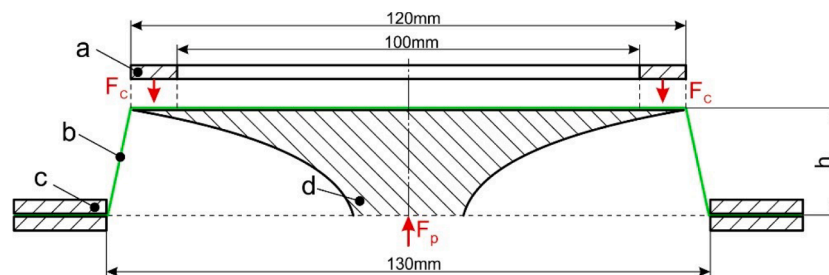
Diagram showing the tensioning and fixing of the membrane to the ring: a – ring (bonded to the membrane); b – membrane; c – aluminum rings; d – piston; F_p – pre-stretching force, F_c – clamping force on the ring.
